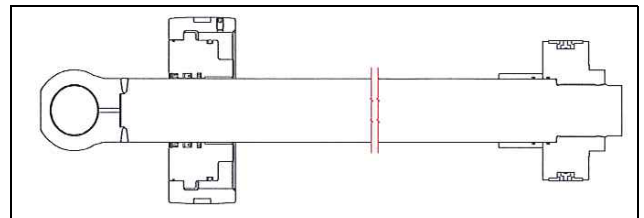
Fix Rod Assembly (Upper Lift Cylinder)
